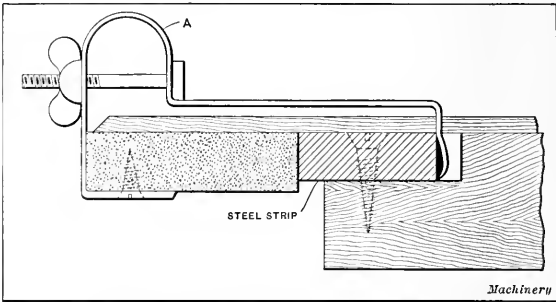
T-square held by Pressure of Clamp Spring on Steel Strip
